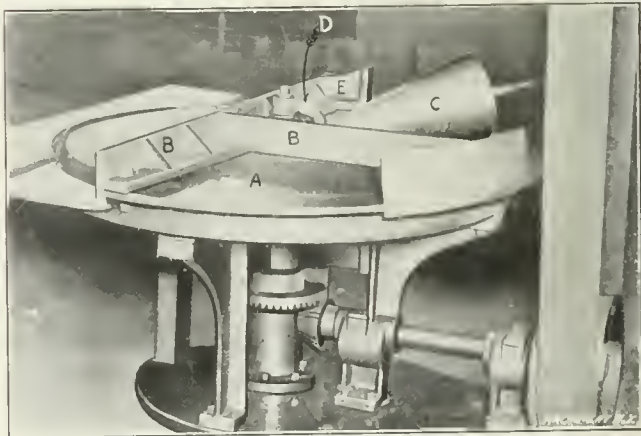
Special Polishing Machine and Charging Roll for Polishing Flat Work
